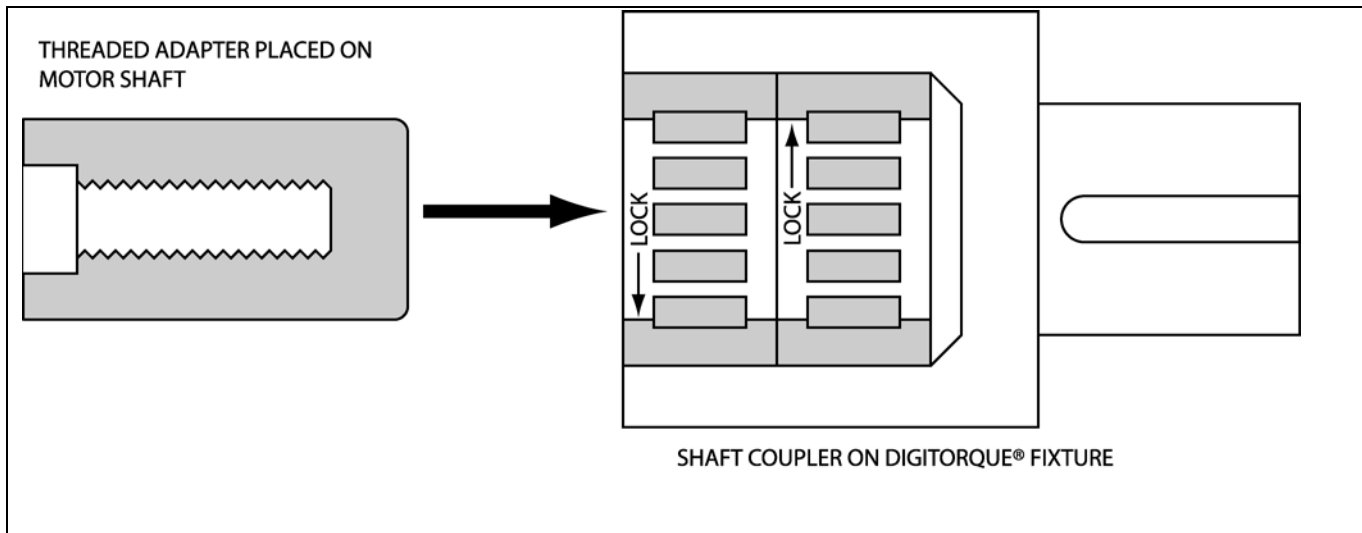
Cut away view of threaded adapter and shaft coupler which, as shown, utilizes two unidirectional clutch bearings to insure the motor and test fixture shafts do not turn independently in automated coupling application.
